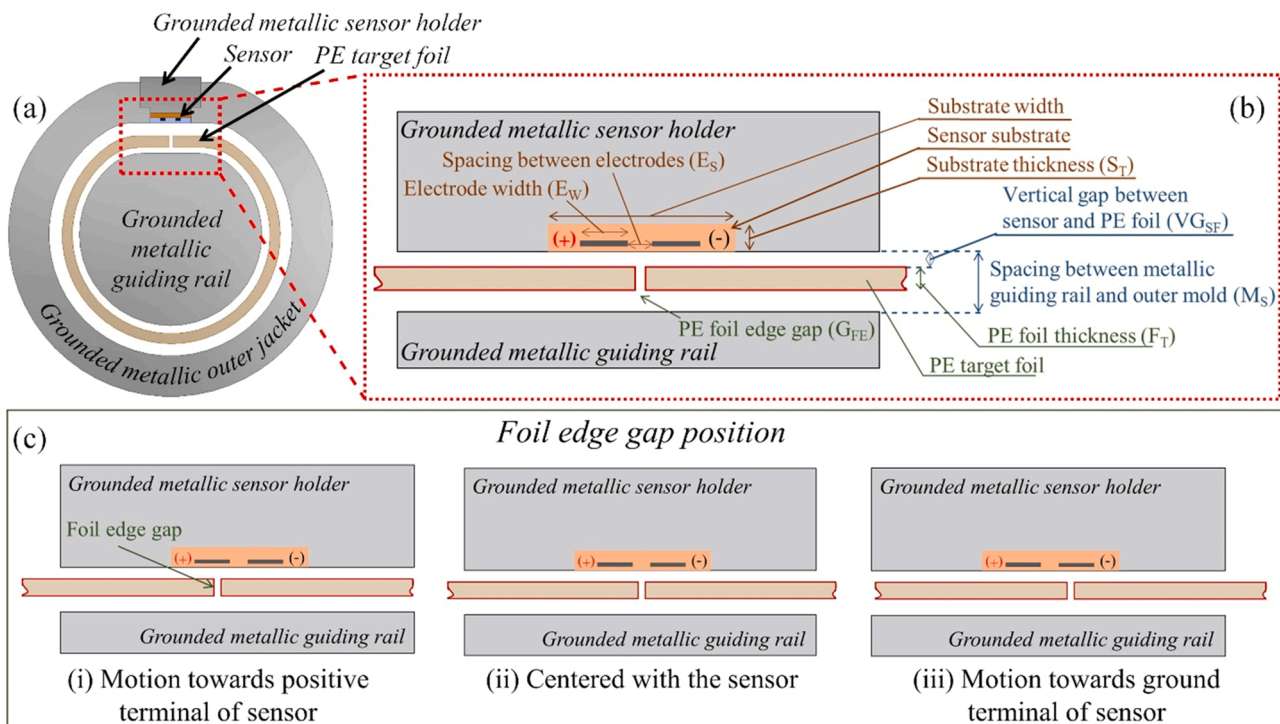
Schematic diagrams of (a) cross-section view of the tubular packaging process along with sensor mounted on the metallic body of the equipment and PE foil edge position in between metallic parts, (b) cross-section view of the foil edge motion on the coplanar capacitive sensor mounted on the metallic guiding rail and surrounded by metallic sensor holder, and (c) foil edge gap position with respect to the center of the sensing area of the capacitive proximity sensor.
